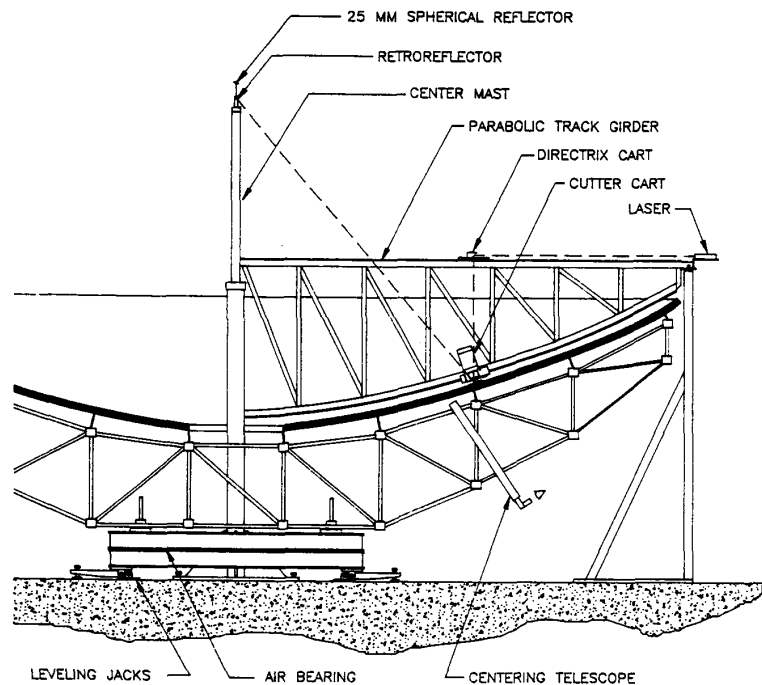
Schematic drawing of the machine used to figure the telescope surface. The beam path for the laser distance measuring system is shown as a dashed line.
